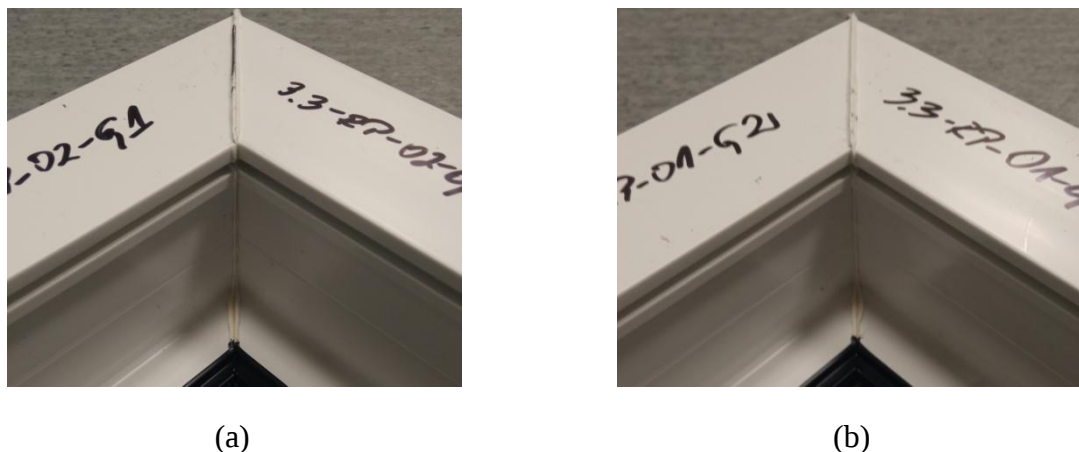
Representative welds from the reconnaissance tests: (a) welded using head 1, (b) welded using head 2 [12]
